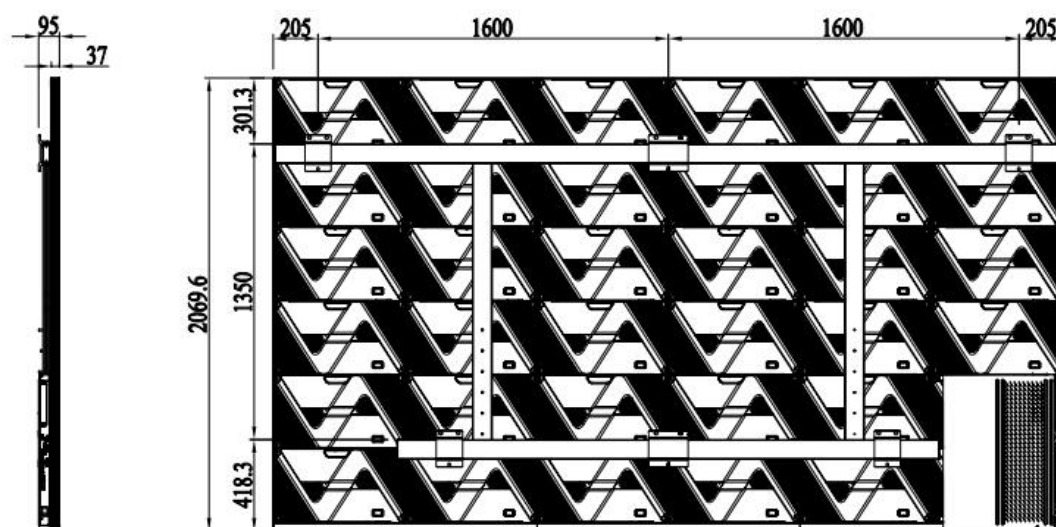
X 4K163 Wall-mounted Back View Schematic Diagram
